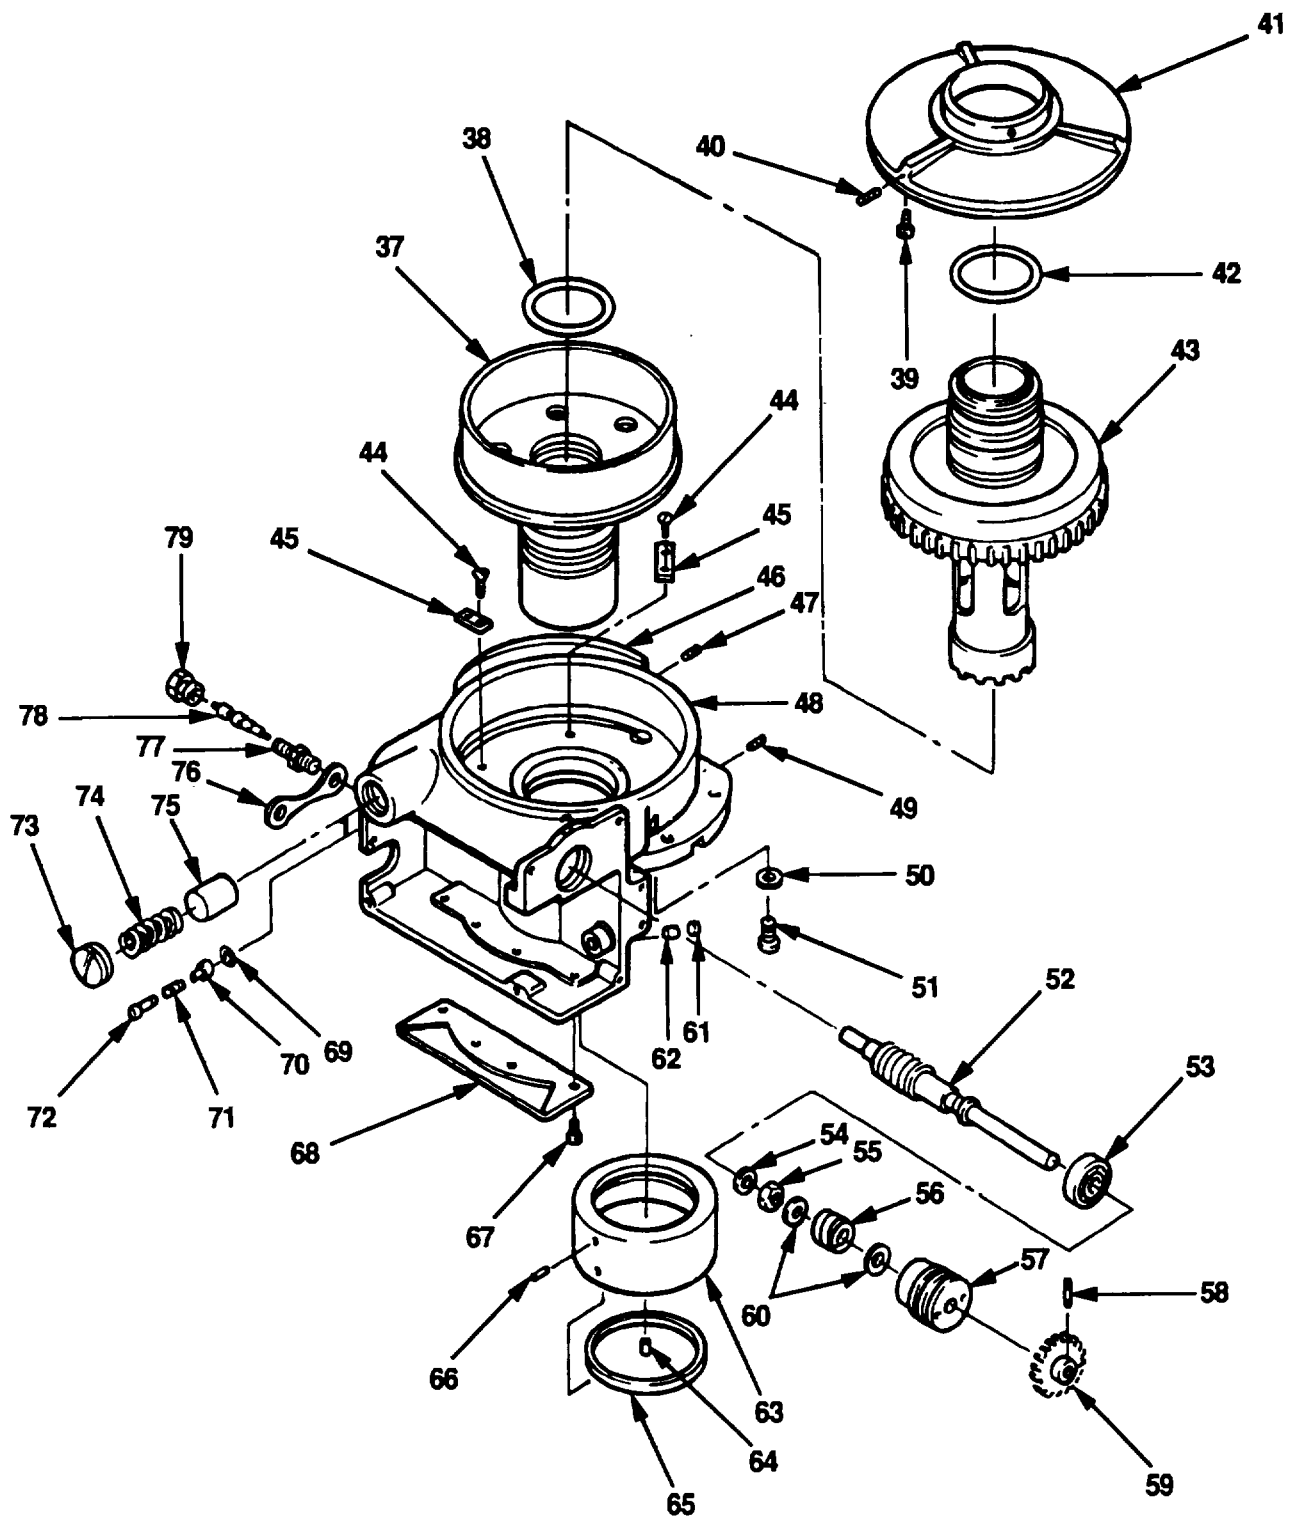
Body Assembly 8587534, Cover Assembly 10541411, and Telescope Subassembly 10541428 - Partial Exploded View (Sheet 2 of 2).
